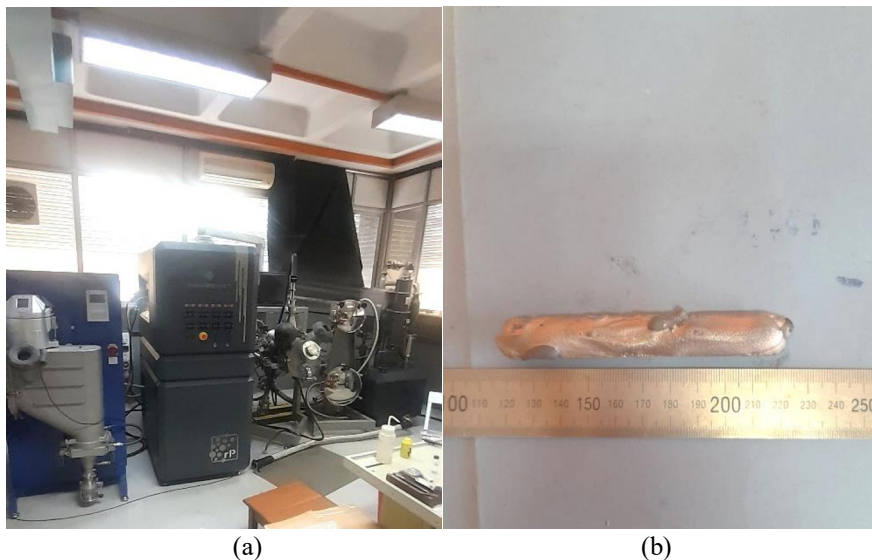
(a) AmazeMet rePowder Electric Arc Melting Machine and (b) metal rod produced by melting compacted powder rods using AmazeMet rePowder machine.
